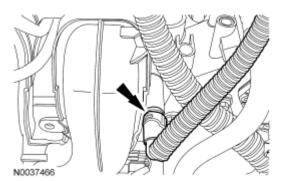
Locating Evaporative Emissions (EVAP) Tube From Intake Manifold Courtesy of FORD MOTOR CO.
